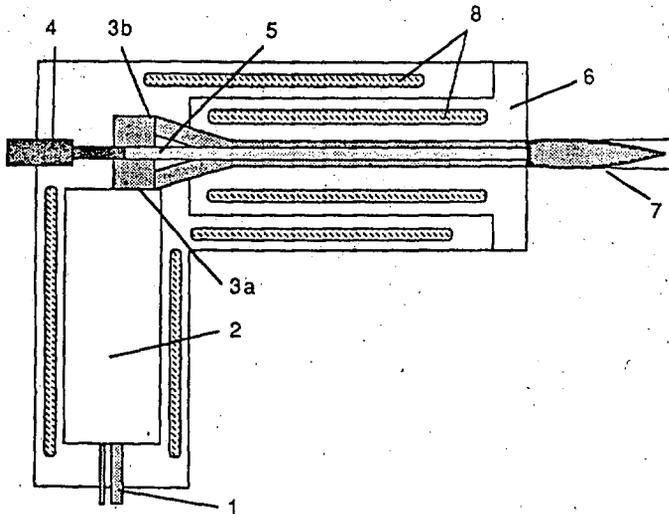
HVOF torch 1. Oxygen and Fuel inlets, 2. Combustion Chamber, 3a & b. Nozzle Feed Ports, 4. Powder Inlet & Carrier Gas, 5. Nozzle Feeder Port, Powder, 6. Nozzle, 7. Gas Jet, 8. Cooling Passage
